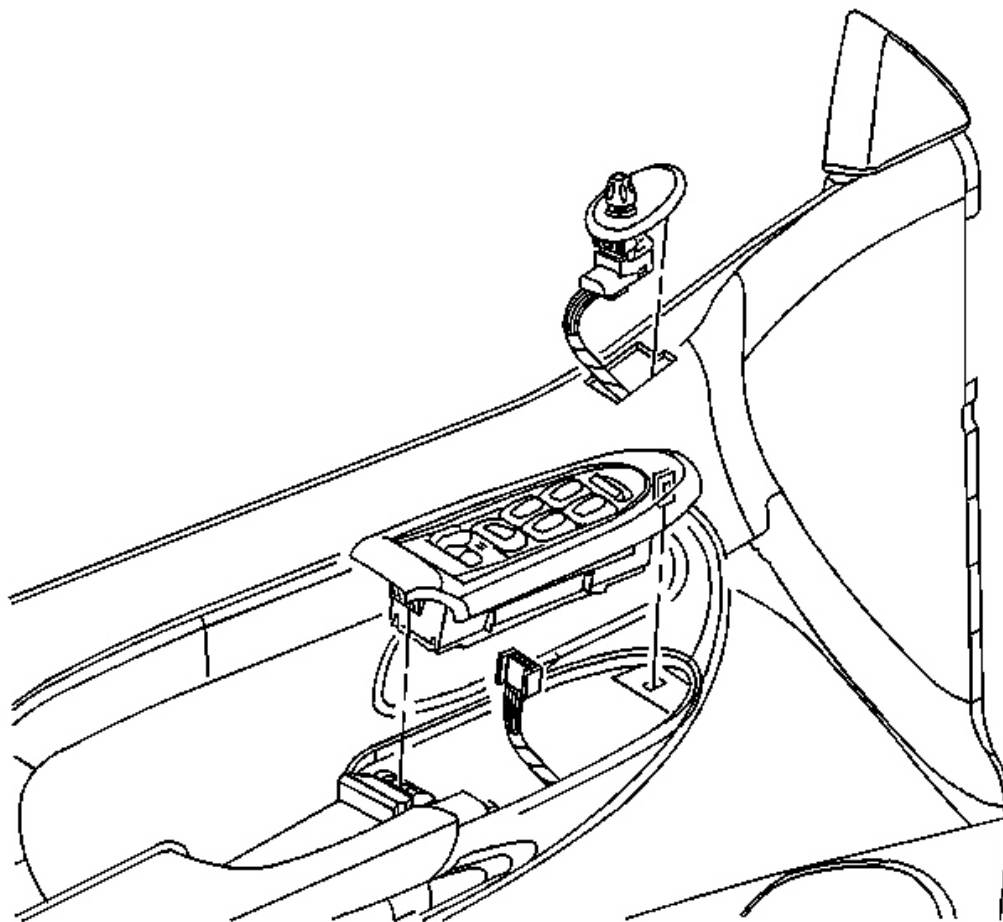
View Of Power Mirror Switch & Driver Master Switch
